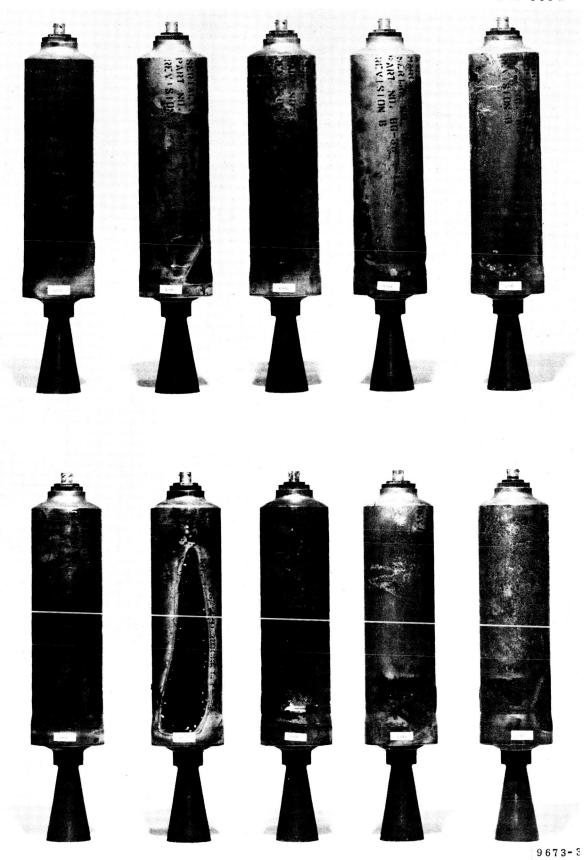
Rocket Motors Q-1 Through Q-10 After Firing.
